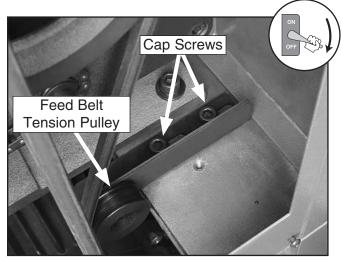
Cutterhead/feed motor tension rod fasteners (bottom left access panel removed).
